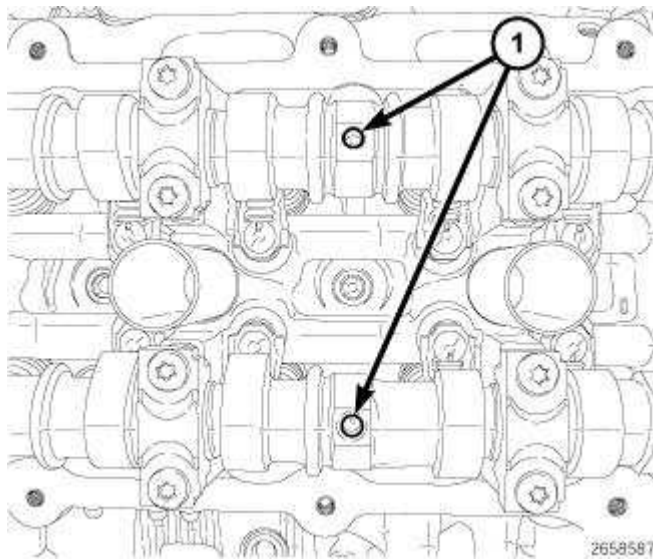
Positioning Camshaft Alignment Holes Vertically
